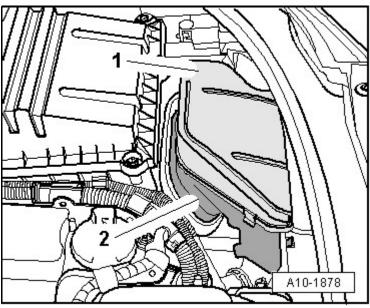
Air Duct Cover & Air Duct Courtesy of AUDI OF AMERICA, LLC
